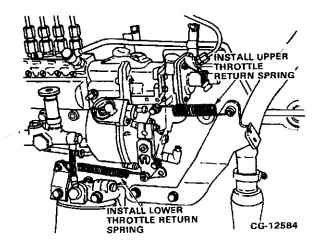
Install the Throttle Return Springs (Current Production Shown)
